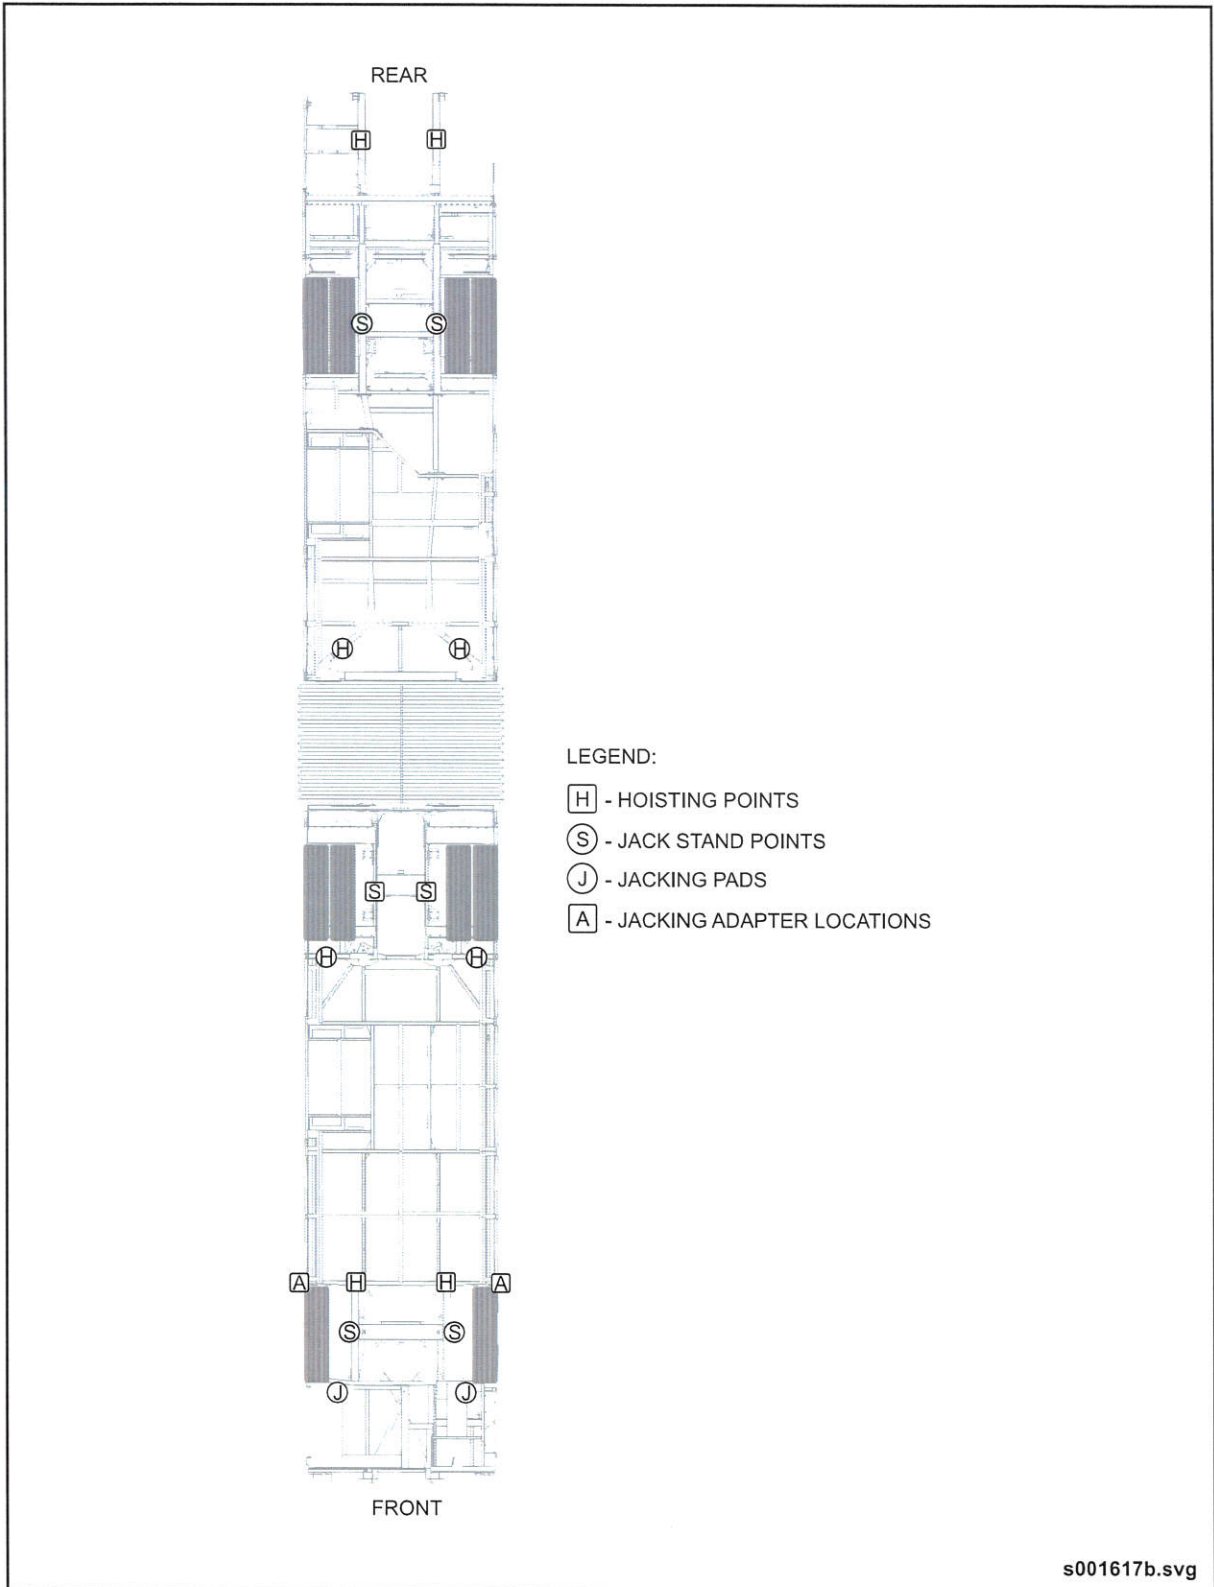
Jacking (hoisting) Points & Stand Placement
